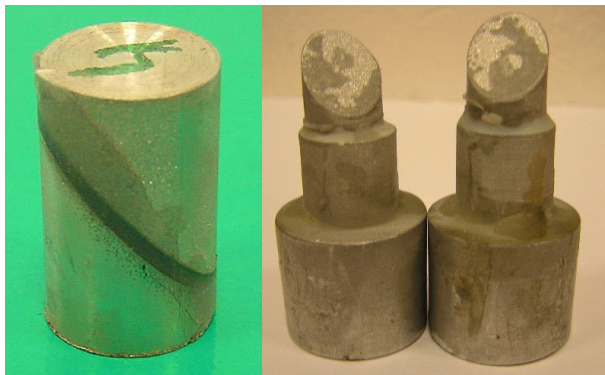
Adhesively bonded cylindrical skew specimen for compressive test and specimens after tensile test
